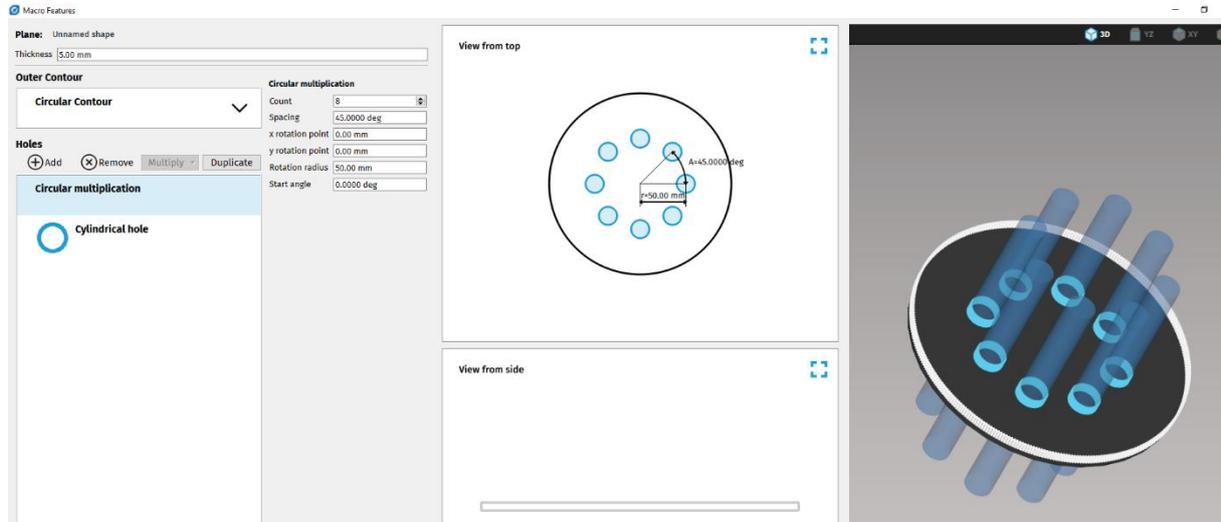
Example of cylindrical hole macro placed on circular plane profile
